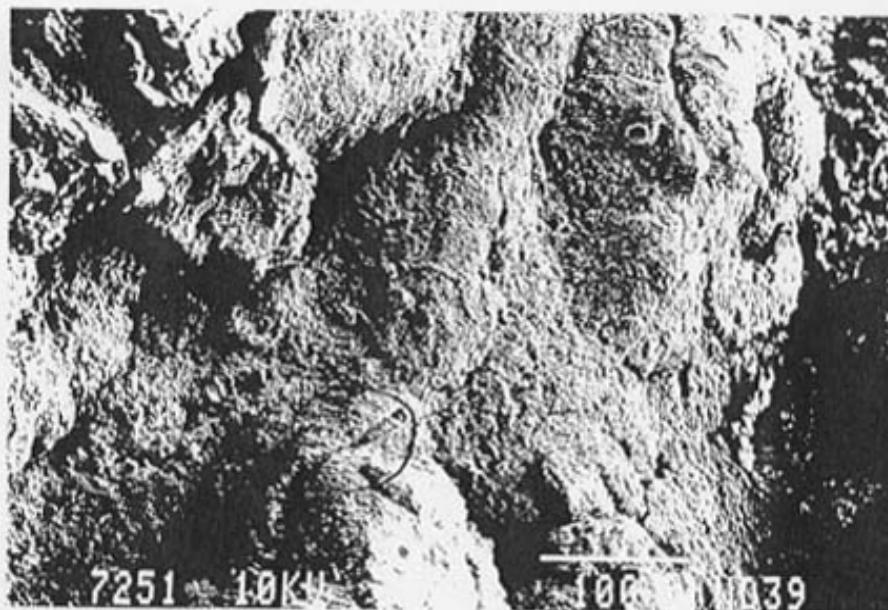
Inner starbord A3 hinge lug secondary fatigue crack striations
